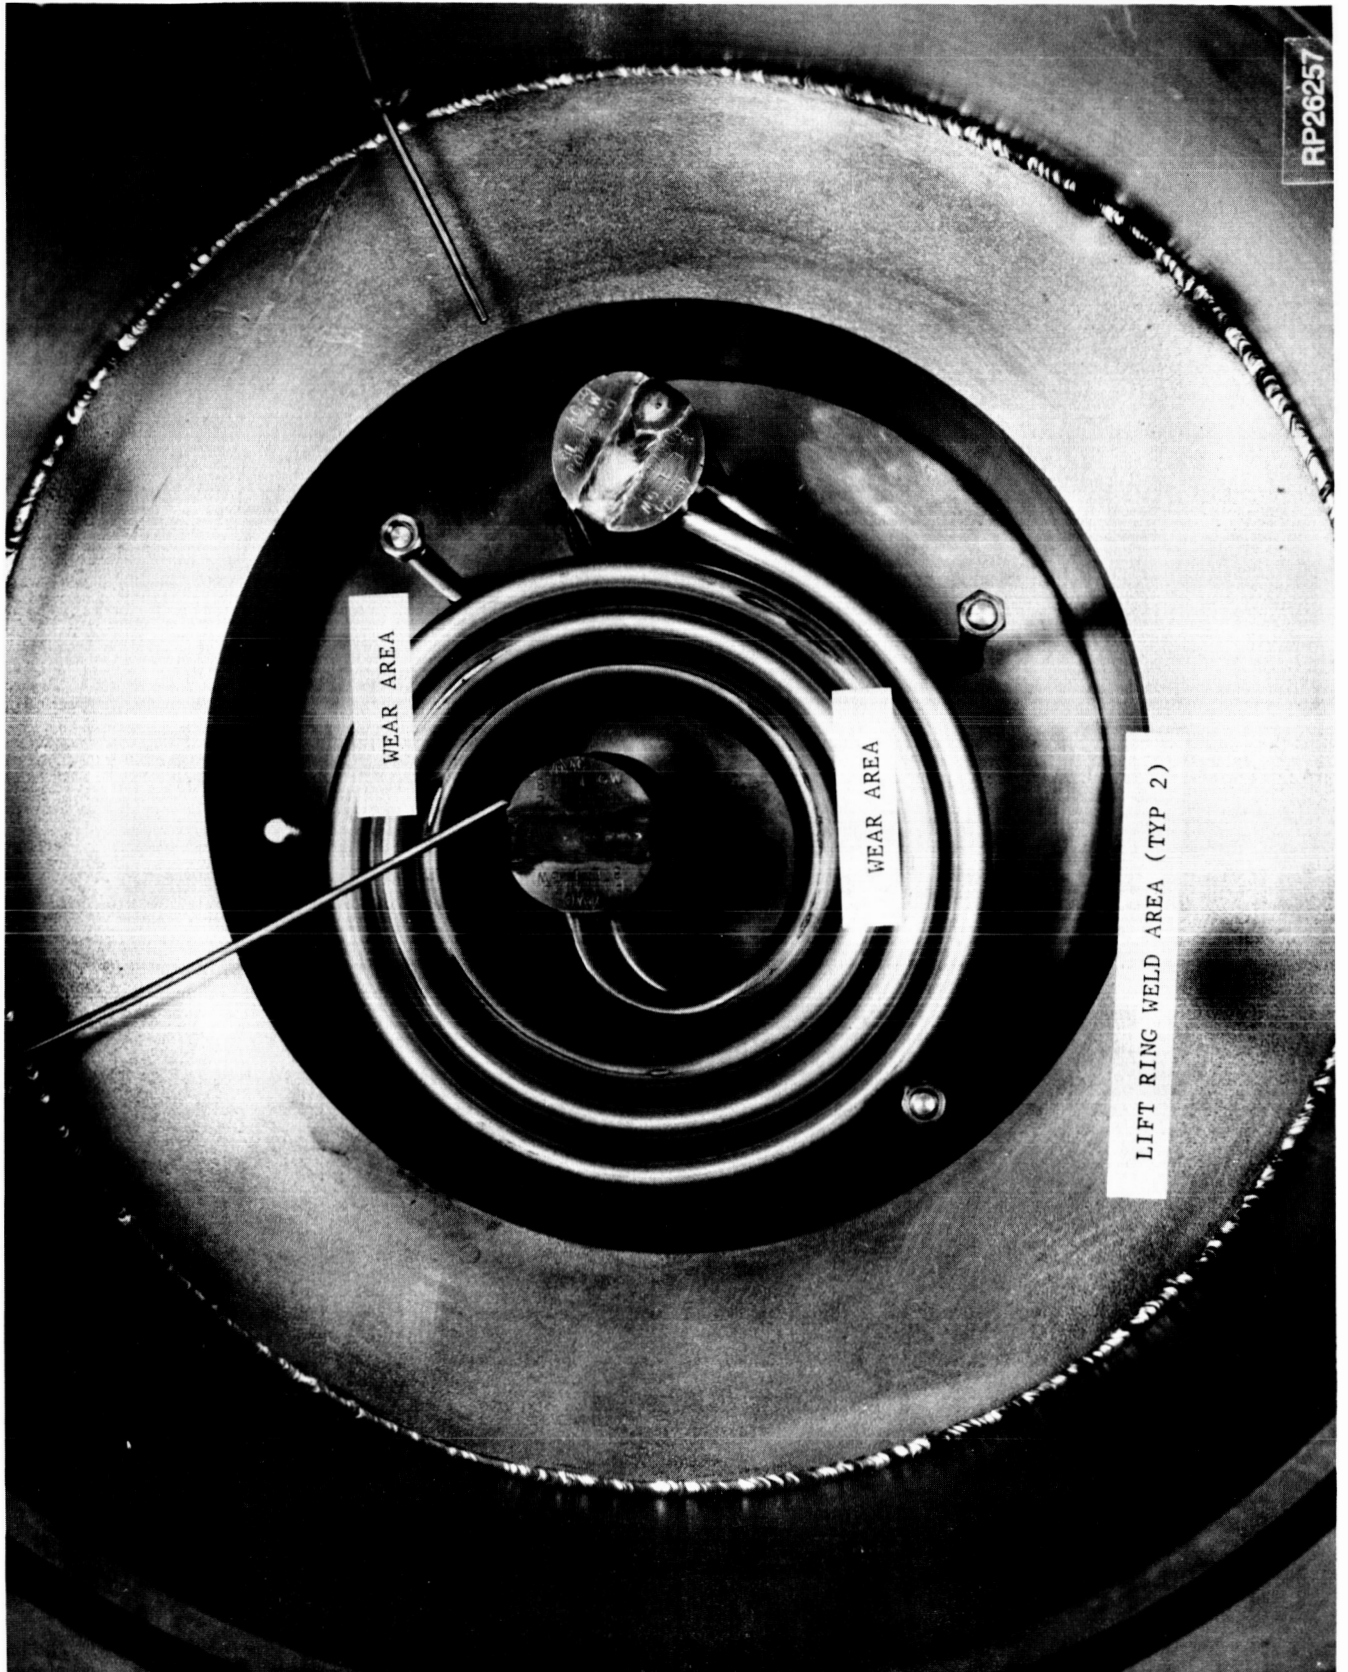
TURBINE SIMULATOR HEAT EXCHANGER - PLATE REMOVED (REF. SAMPLE #4) - POST TEST
